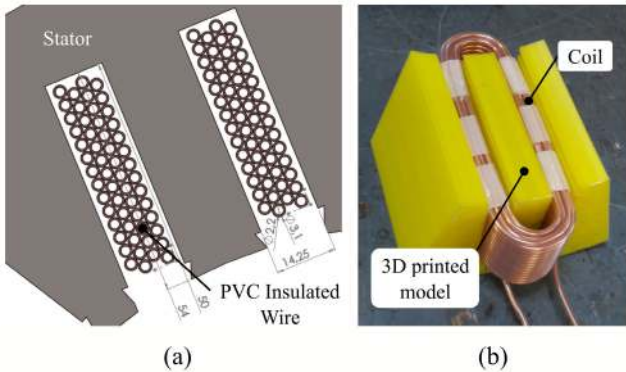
(a) Wire positions of one complete coil in the stator slots and (b) 3D printed model of a part of the stator core with a coil inserted.
